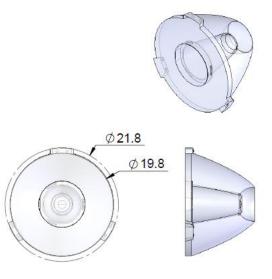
FNL-S1-20-R drawing (dimensions in mm)
